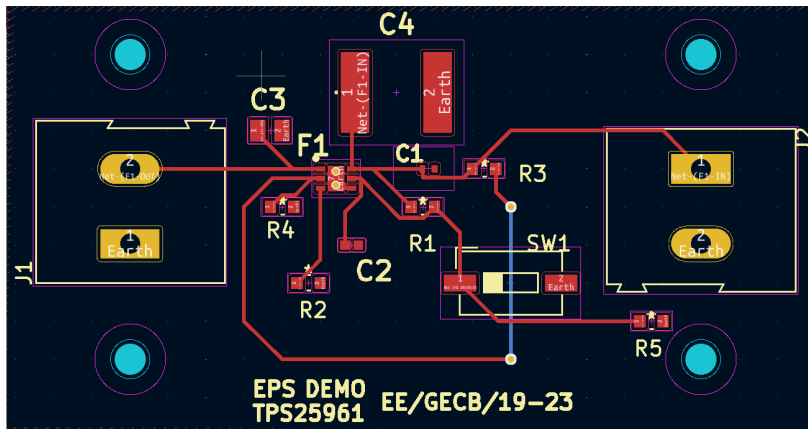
PCB Layout of protection circuit (55mm x 28mm)
